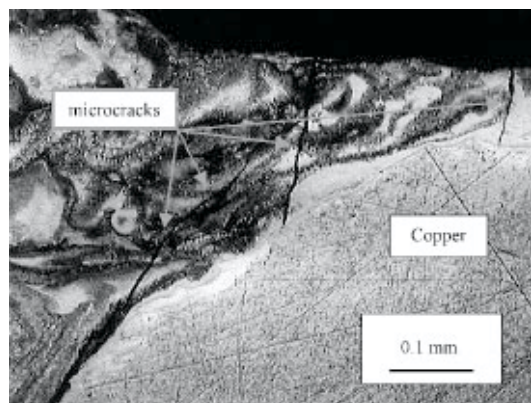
Micro cracks close to the copper side of a laser beam welded component.
